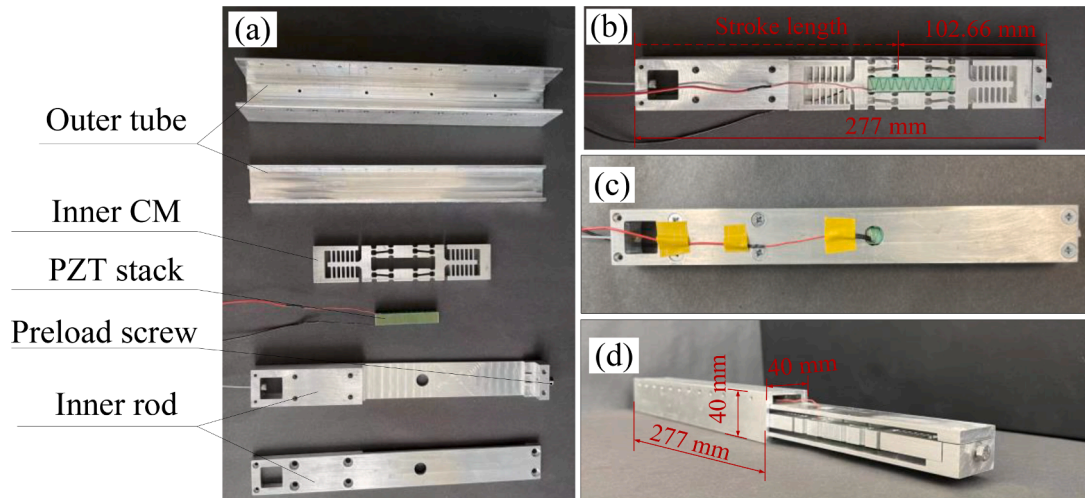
The fabricated prototype. (a) Main parts of the prototype fabricated by CNC and the PZT stack actuation. (b) Assembly of the inner CM and the PZT stack. (c) Assembly of the inner rod. (d) The assembled lockable P joint.
